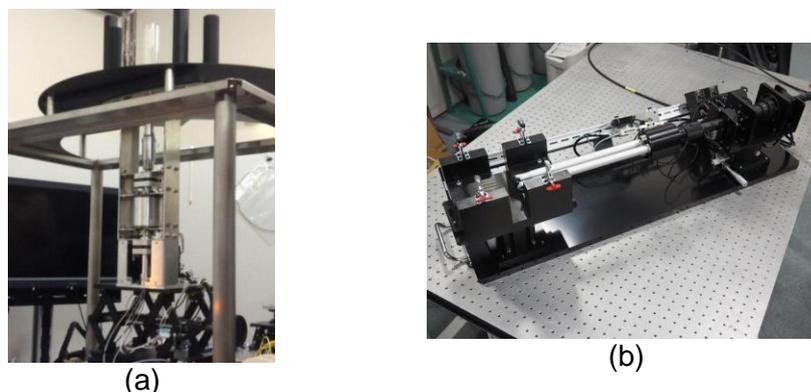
High power laser processing heads; (a) prototype laser maintenance device for a vertical heat exchanger, (b) advanced laser welding device for the butt section of steel pipes
